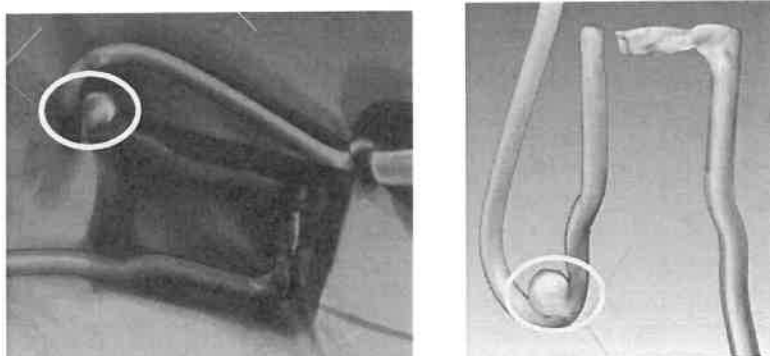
CT scans of the TCO showing the solder bead (Sub 64)
